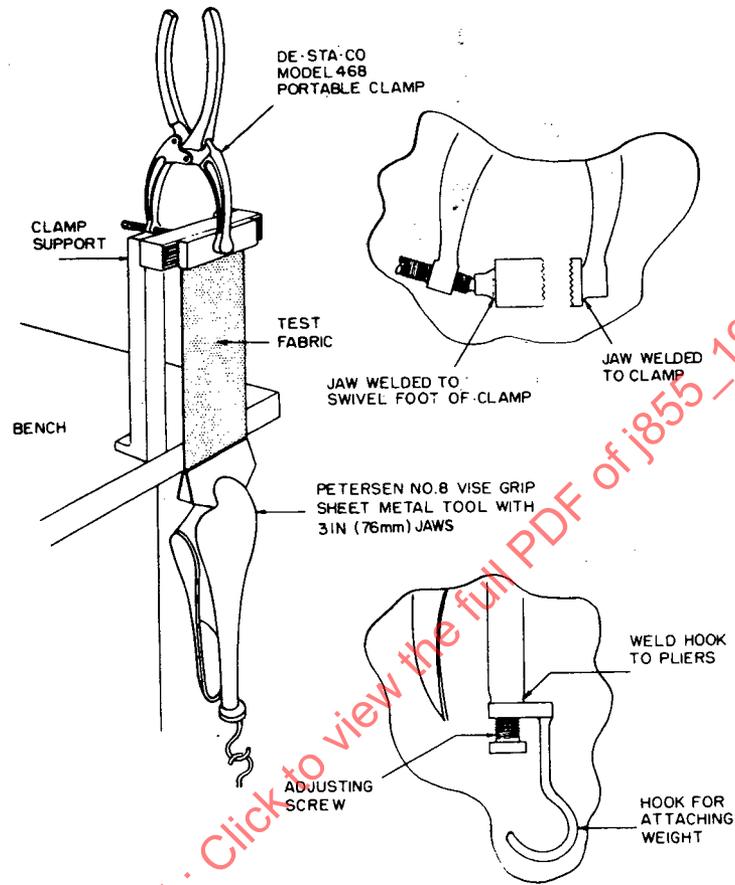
CLAMP AND FIXTURE ASSEMBLY FOR STRETCH AND SET OF TEXTILES
